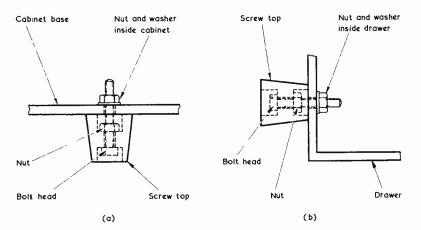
(a). Toothpaste tube screw tops with recesses in the head make excellent cabinet feet (b). The screw tops may also be used as knobs for small
